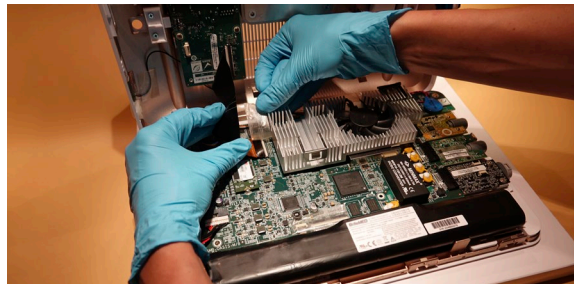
Open the back casing carefully and remove adhesive tape where necessary
